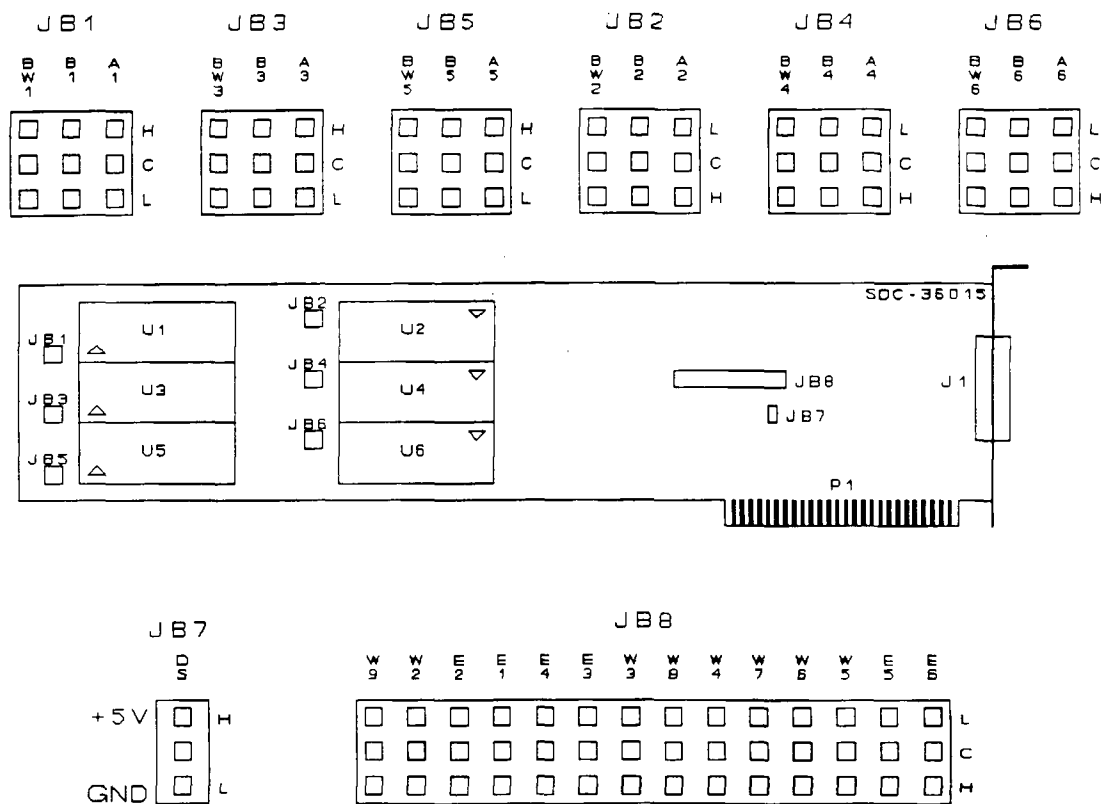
SDC-36015 MECHANICAL ASSEMBLY OUTLINE
